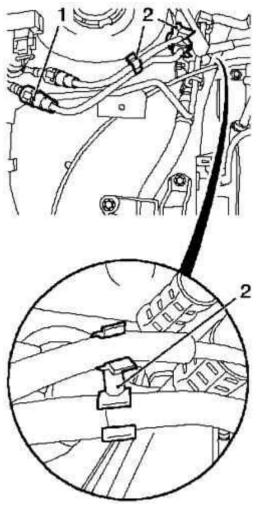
Mounting withdrawal line vent: 1 - a quick-coupling 2 - bracket
